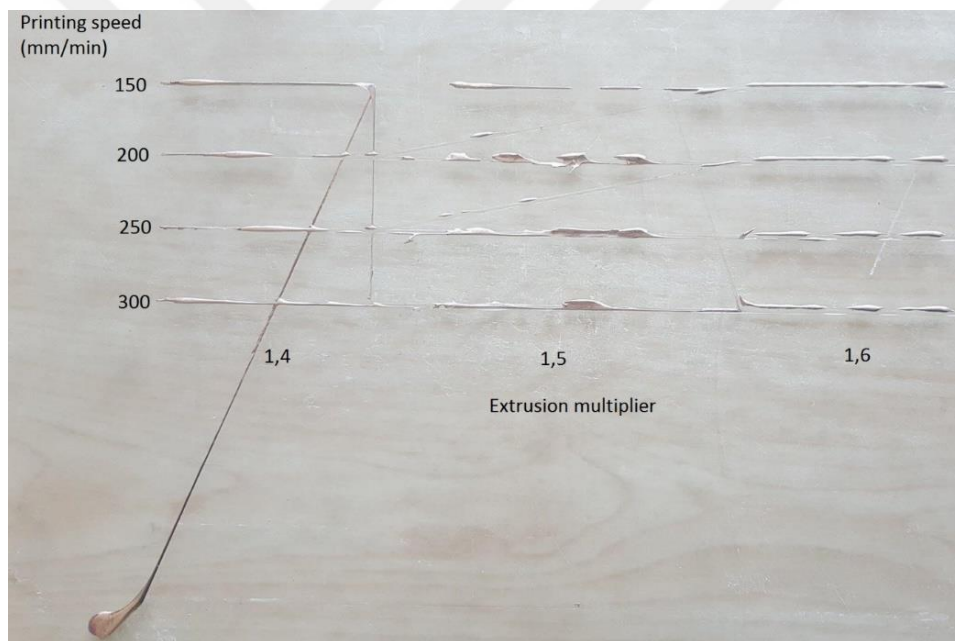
Lines printed in the ET of 145 °C using 1.02 mm diameter brass nozzle
